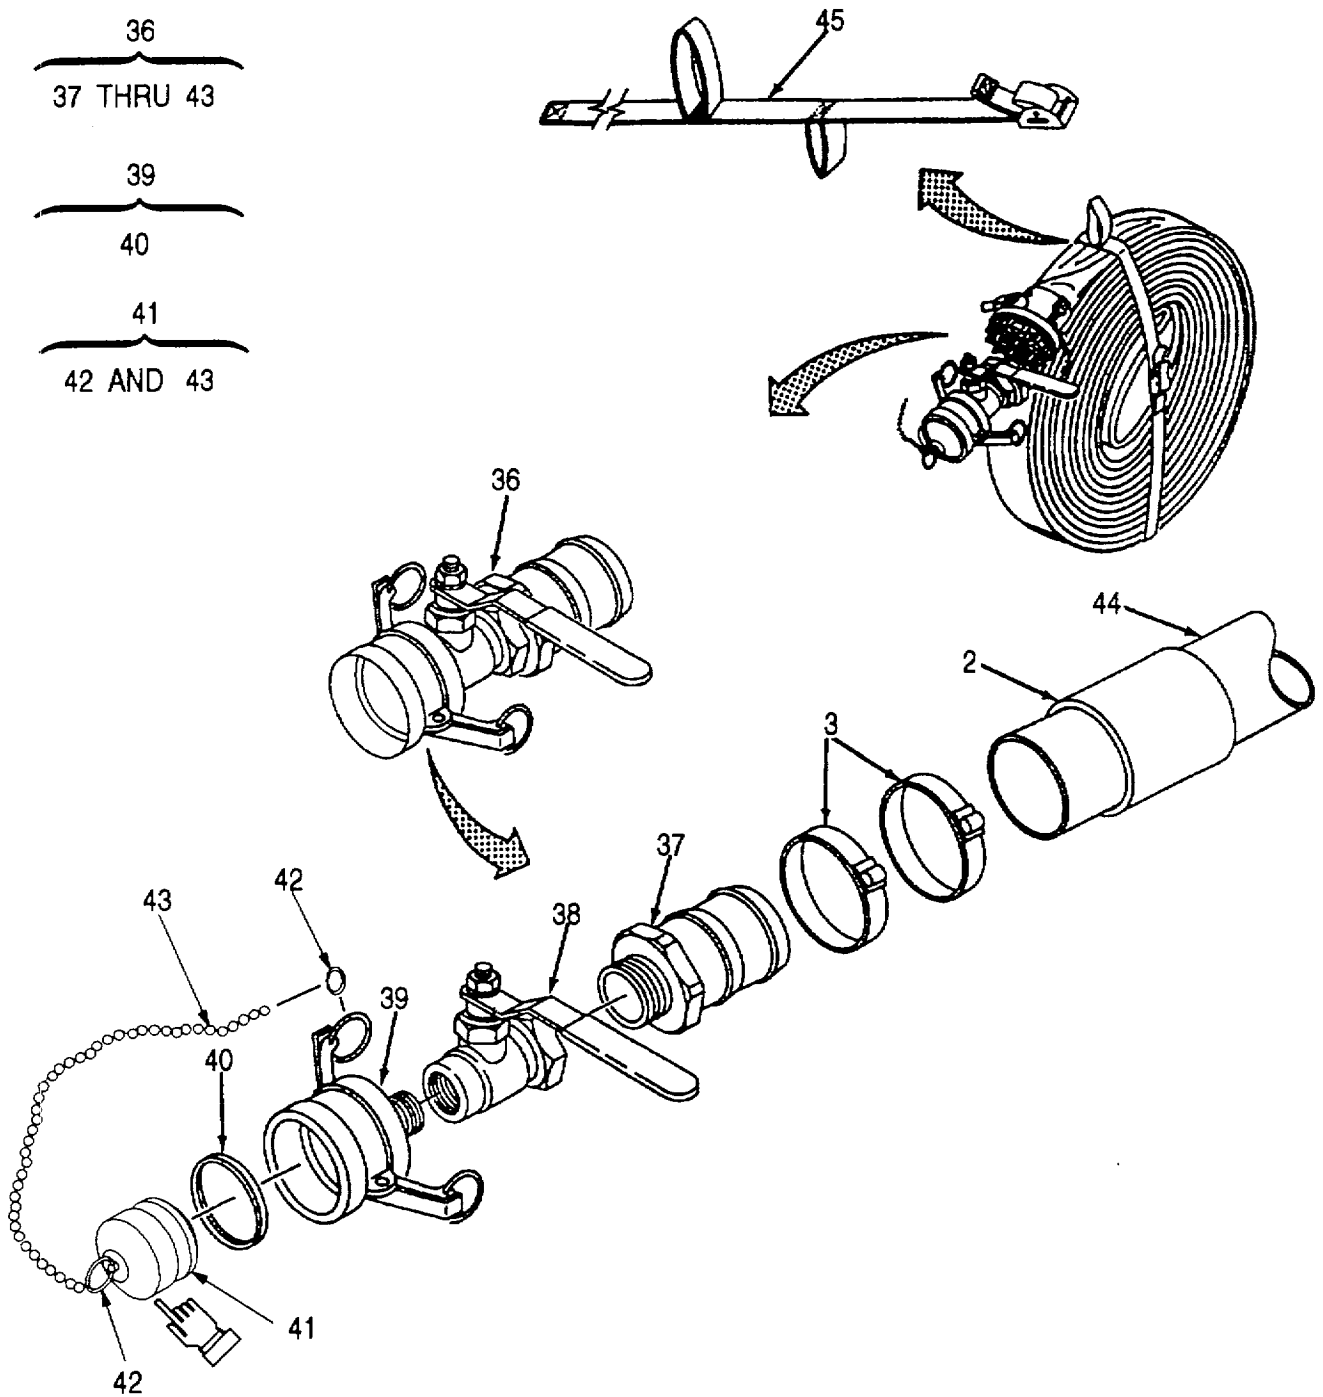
Discharge Hose Assembly (Sheet 2 of 2)
